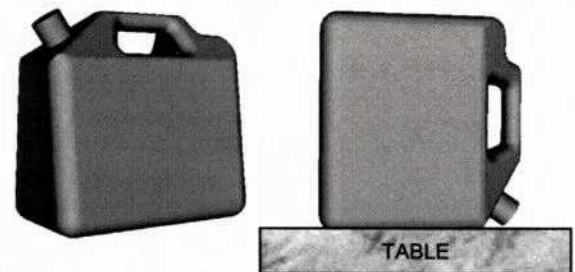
Gas container blow moulded part. Position while out of mould cooling.
